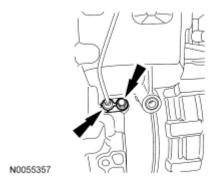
Identifying OSS Sensor & Bolt Courtesy of FORD MOTOR CO.
